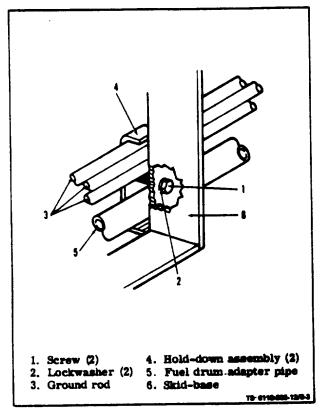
Ground Rod and Fuel Drum Adapter Pipe Hold-Down
